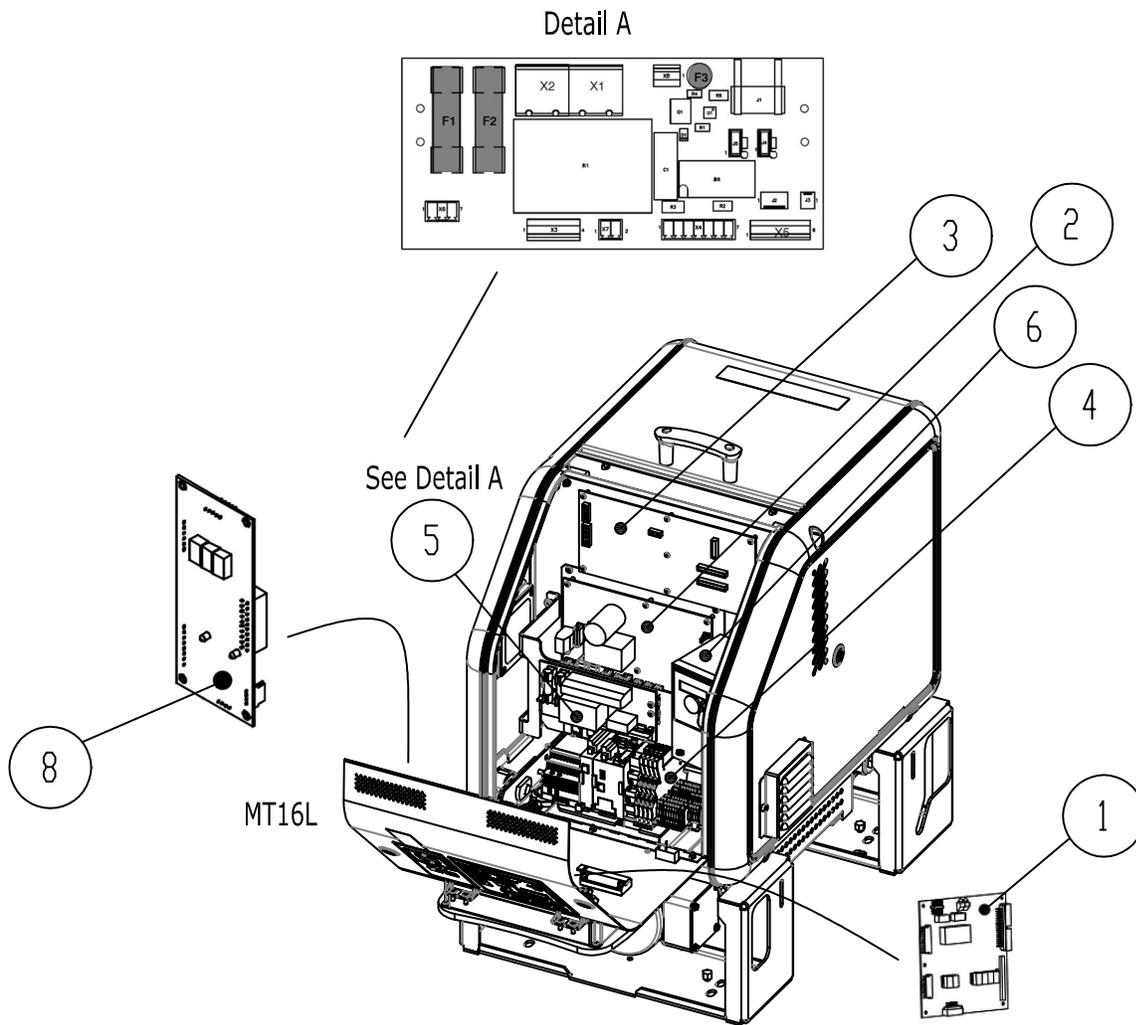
Circuit boards and motor drives on melters with a relay board
